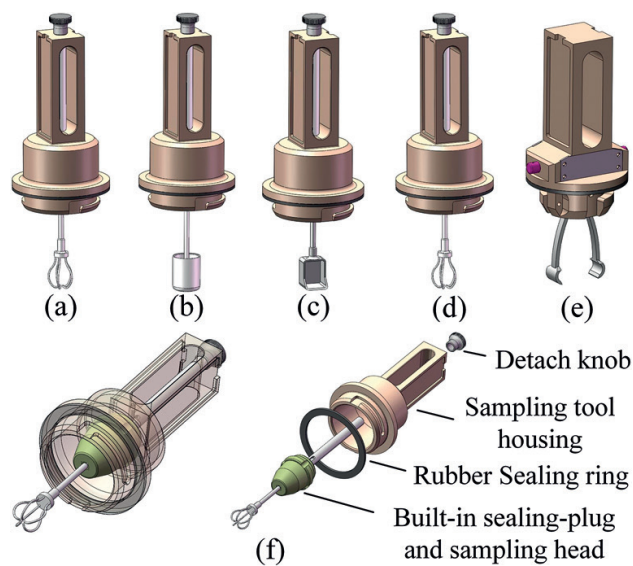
Five crucial kinds of sampling tools: (a) dry cotton ball tool, (b) bucket tool, (c) shovel tool, (d) wet cotton ball tool, (e) tweezers tool, (f) the components of sampling tools.
